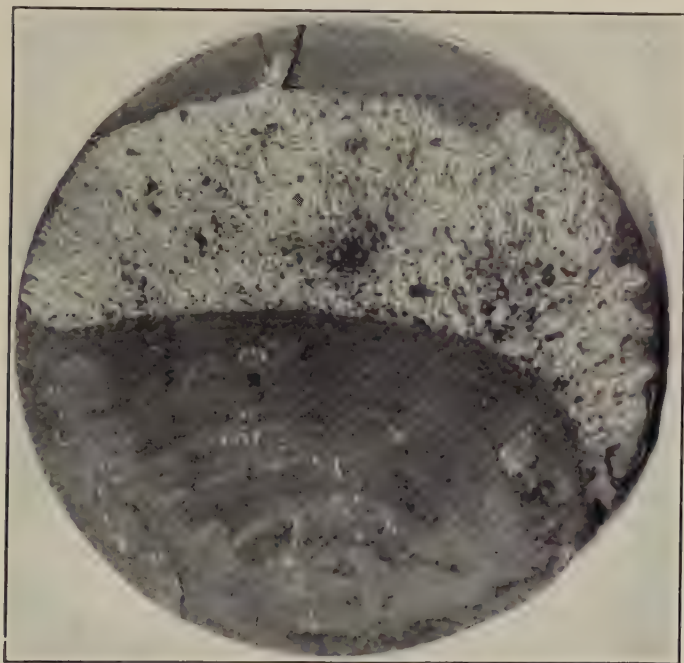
Showing a Hammer Piston Shaft That Failed by Fatigue.
